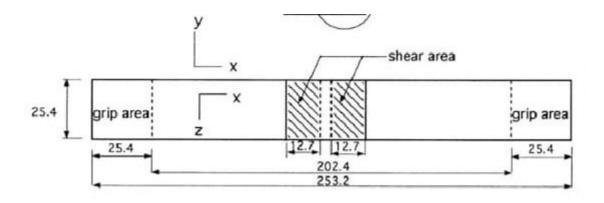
Specimen Dimension for Double Lap Shear Test
